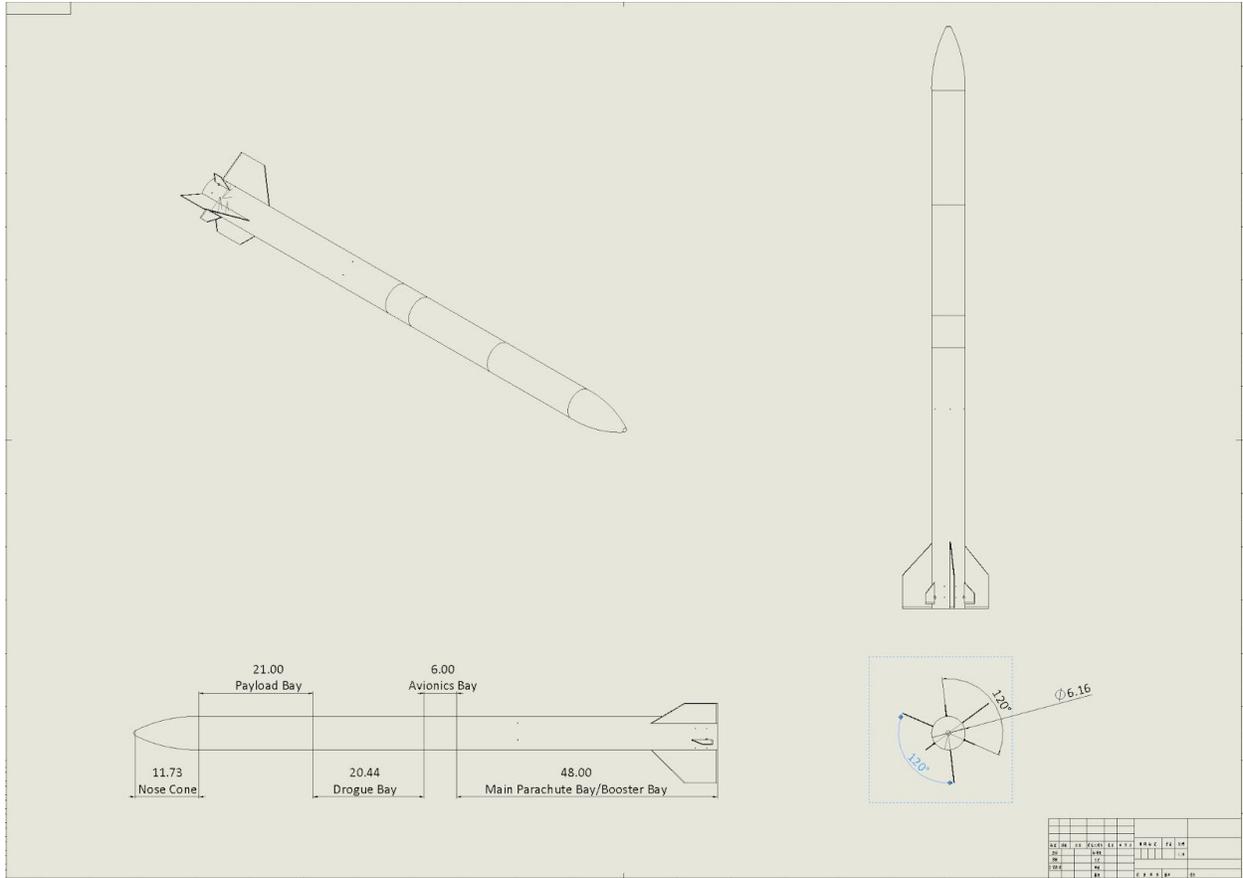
CAD Drawing of Full Rocket Assembly
